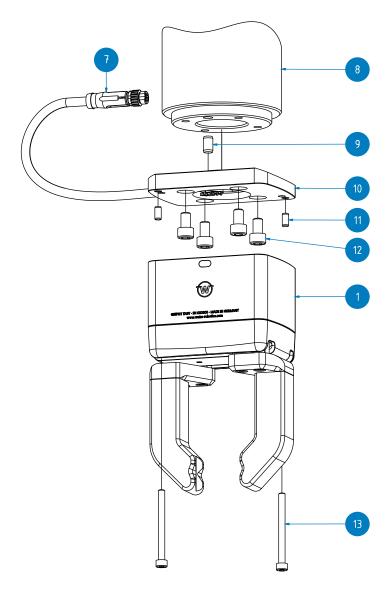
Assembly of the gripping module of the gripping module onto robot flange
